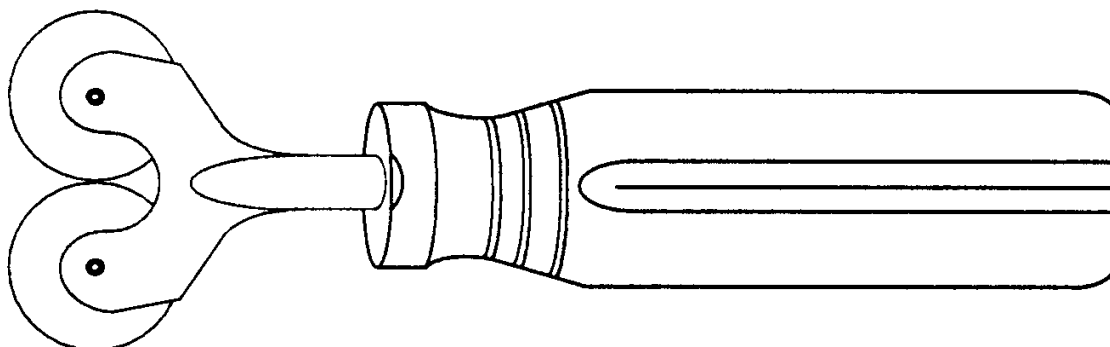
Knife Sharpener Type Edge Finishing Tool
